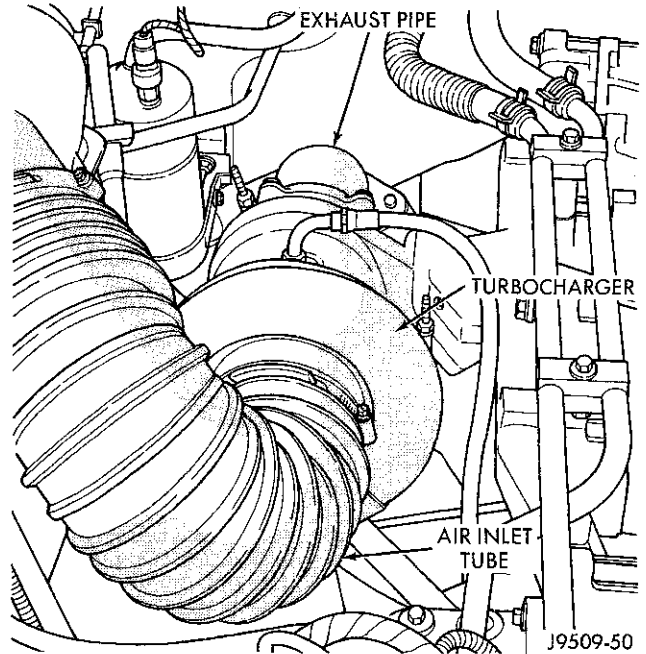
Air Intake Pipe, Exhaust Pipe and Turbocharger
